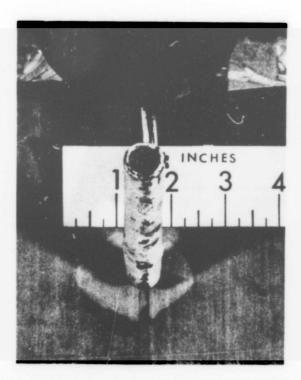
Typical Crack Arrest Behavior of 7075-T6 Bare Panels With One 7-Inch by 0.010-Inch 1002-S Fiberglass Strap on Impact Side of Specimen.
